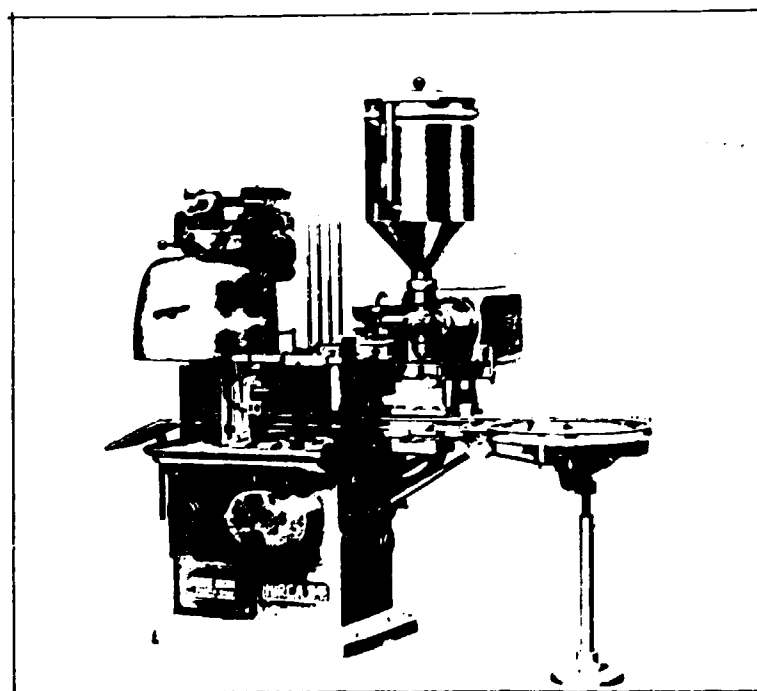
Typical dosing-seaming machine, automatically operated seaming head (courtesy of Luciani)
